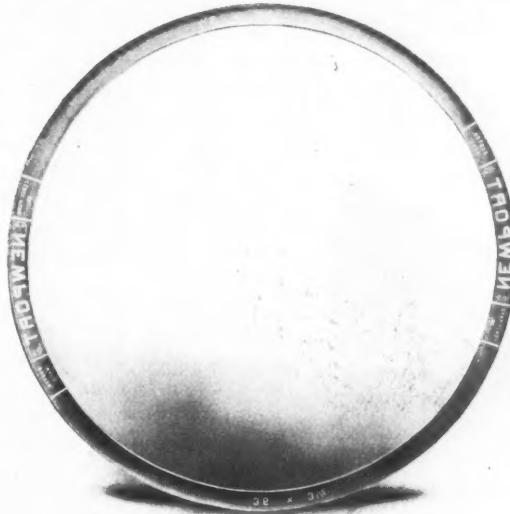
Tire-mold engraved on Machine illustrated in Fig. 2
